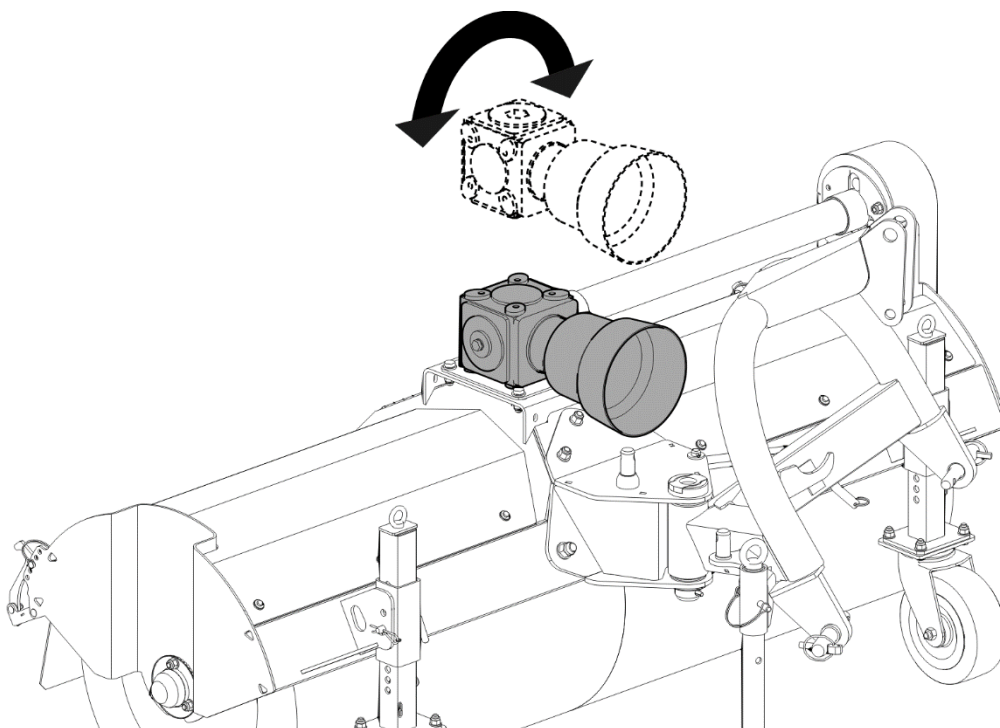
Changing the position of the intersecting axis gear's shaft
